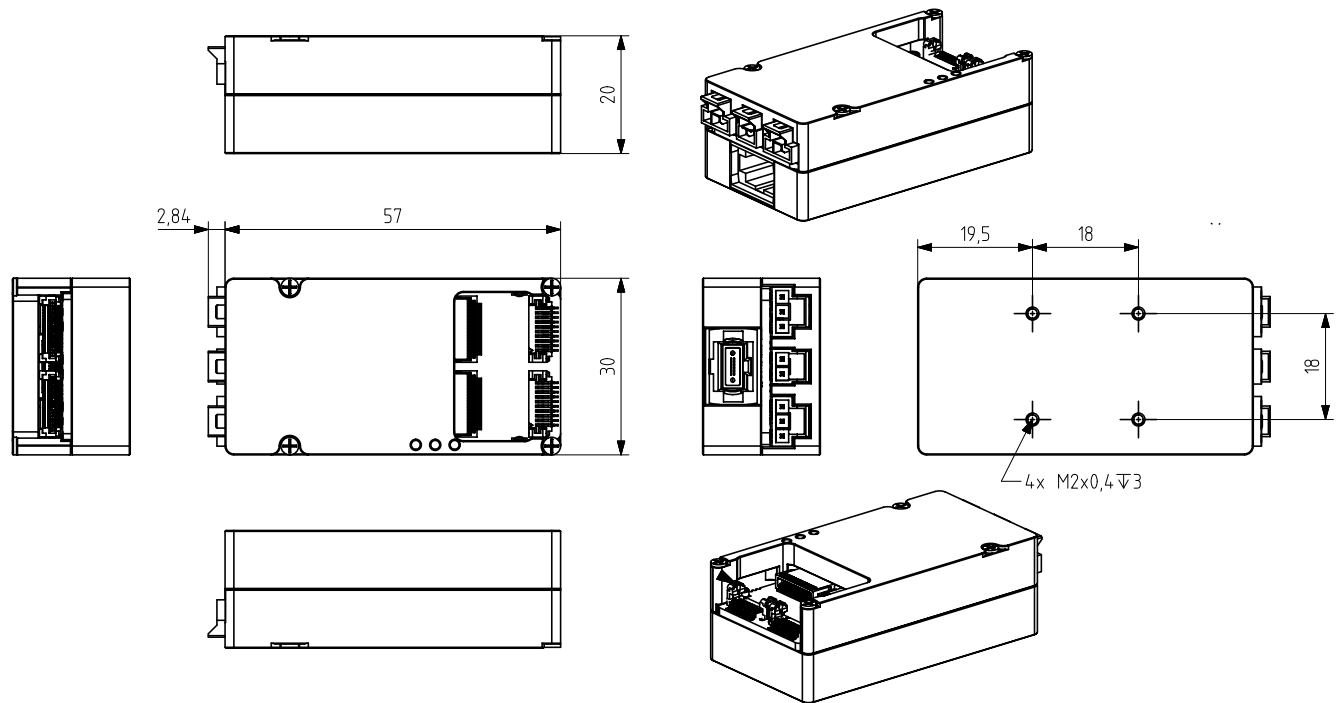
ADPT-2P-X2G3-FF-X4G3-MTP dimensional drawing
